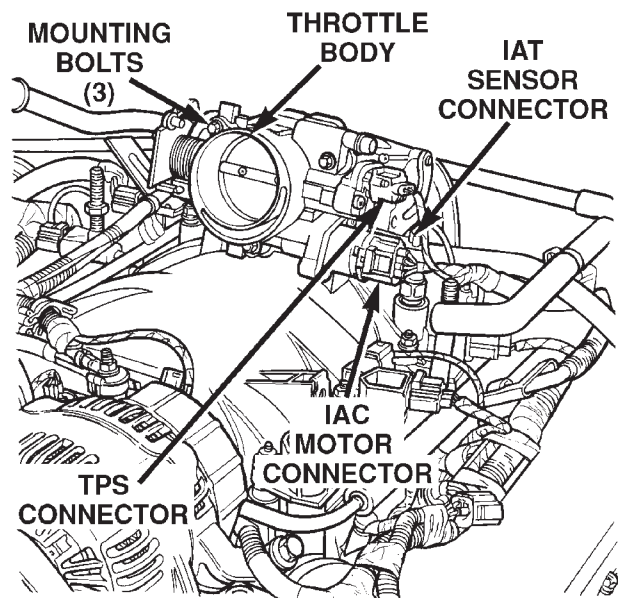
Throttle Body, Sensors and Electrical Connectors—4.7L V-8 Engine
